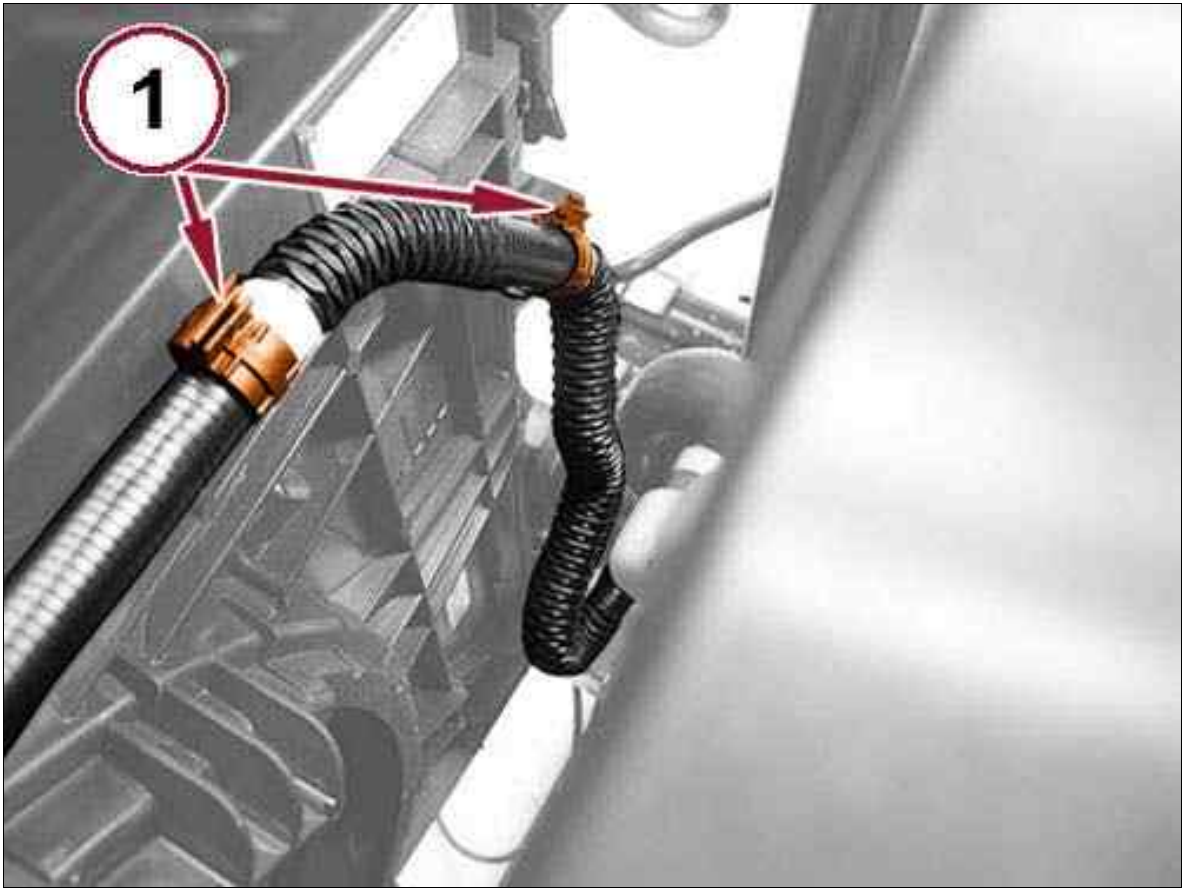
Cooling Fan Wire Harness Connectors & Clips
